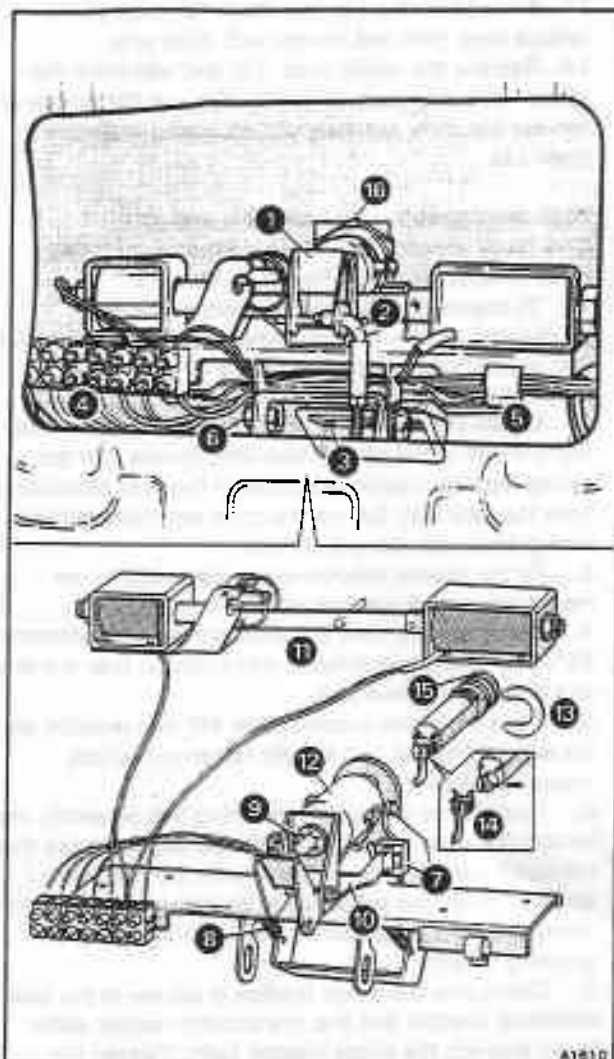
Lock mechanism (incorporating a metal release lever)
